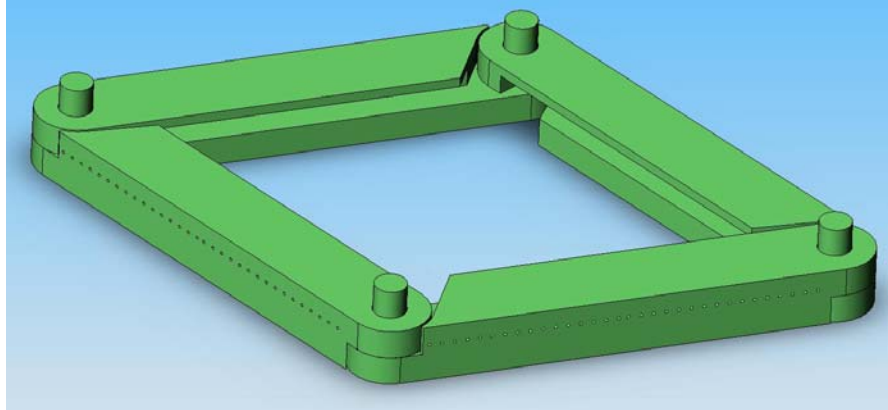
SolidWorks drawing of first FESMPP frame given to rapid-prototyping machine
